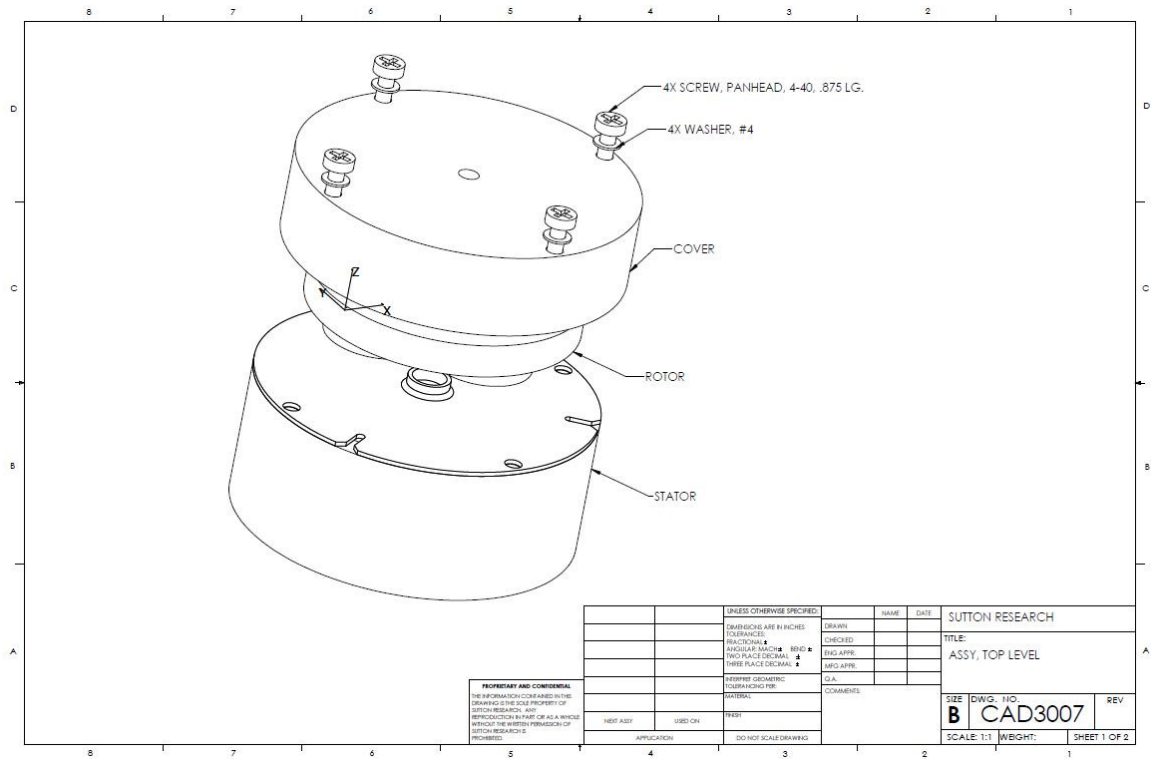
Assembly, Top Level, Drawing, Isometric View. This figure details the top level assembly for the permanent magnet machine built and tested for experiments 3 and 4.
